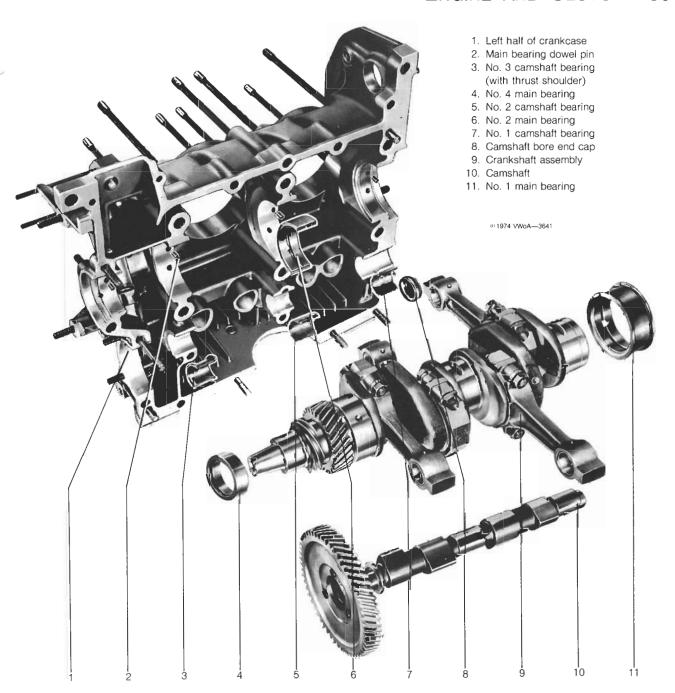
Crankshaft assembly and camshaft removal. A dual-carburetor or fuel injection engine is shown, but the parts are similarly installed in earlier engines.
